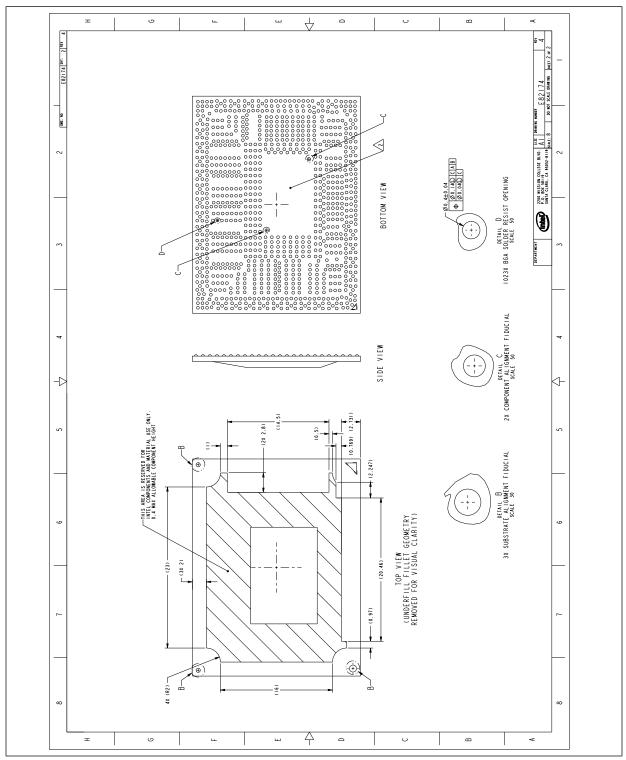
Processor BGA1023 2C (GT1) Mechanical Package (Sheet 2 of 2)
